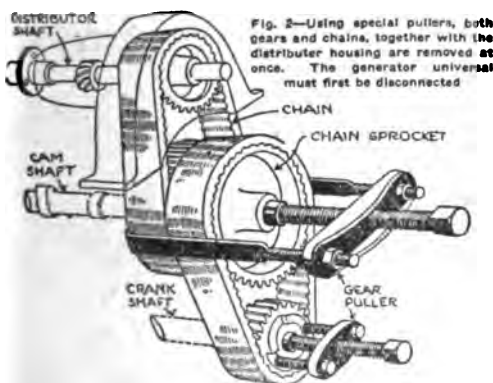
Using special pullers, both gears and chains, together with the distributor housing are removed at once. The generator universal must first be disconnected
